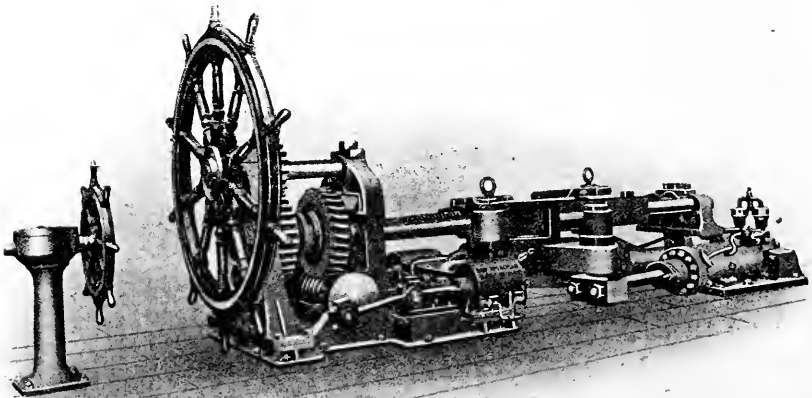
Combined Hand and Steam Steering Gear as fitted in High-speed Cross Channel Steamers.
